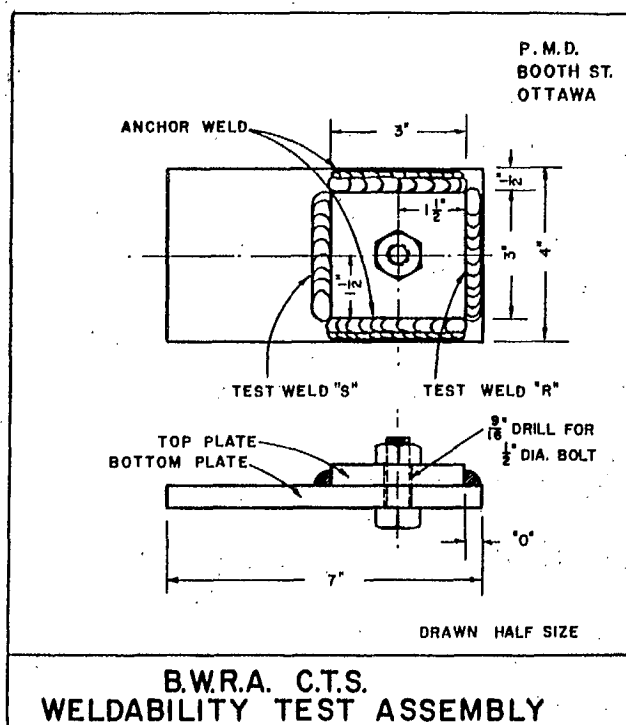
Plate dimensions and assembly method for C.T.S. test
